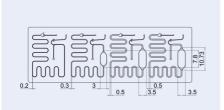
Schematic drawing of blister test chip 1021 with metering system – view from bottom
